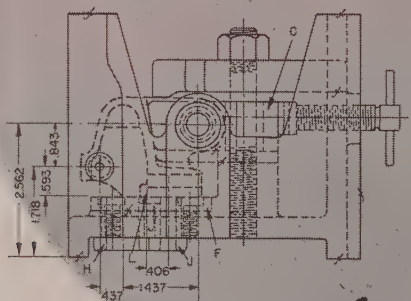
(right) — Caster roll swivel bracket—example where an unfinished surface is used as a locating medium for machining operations
